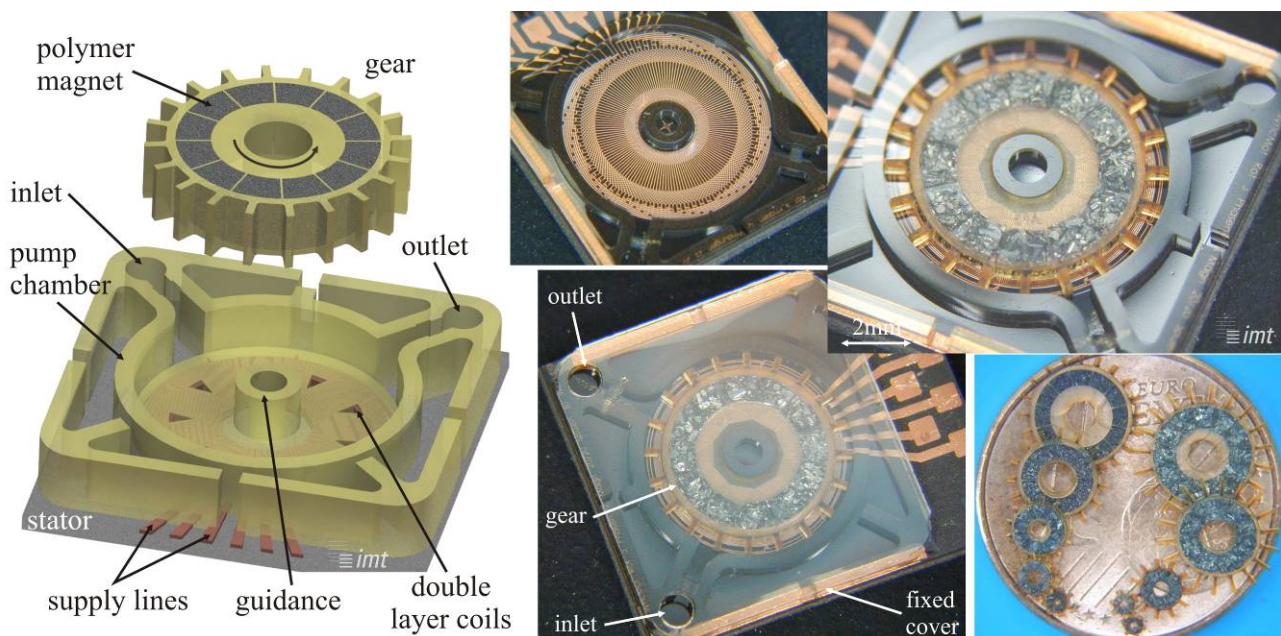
Schematic view of the set-up of the gear pump (left) and photographs of the fabricated components (right).
